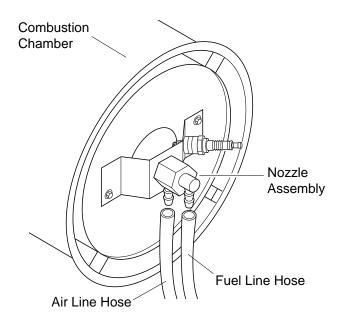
Removing Air and Fuel Line Hoses, 30,000 BTU/Hr Model
